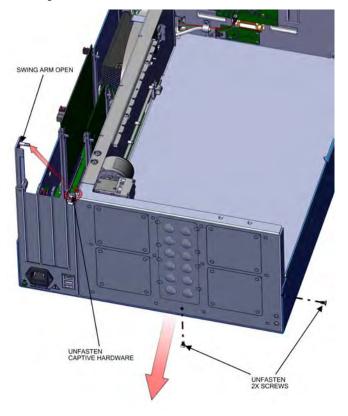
Unfasten Hardware Rear for Measurement Side Removal
